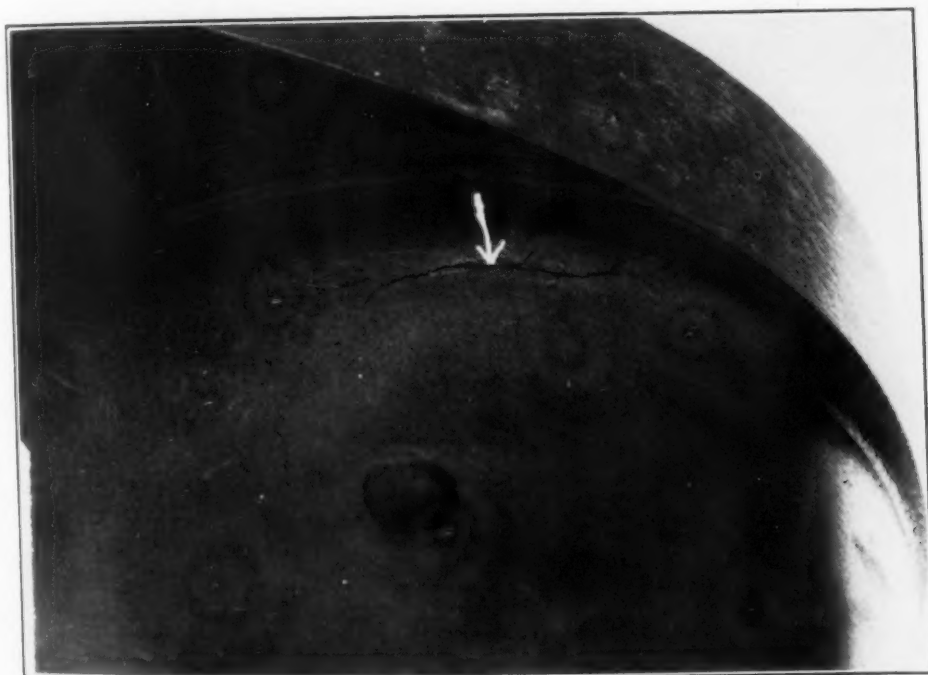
Photograph Showing Fillet of Crankshaft Journal Showing Crack. (About Actual Size.)
